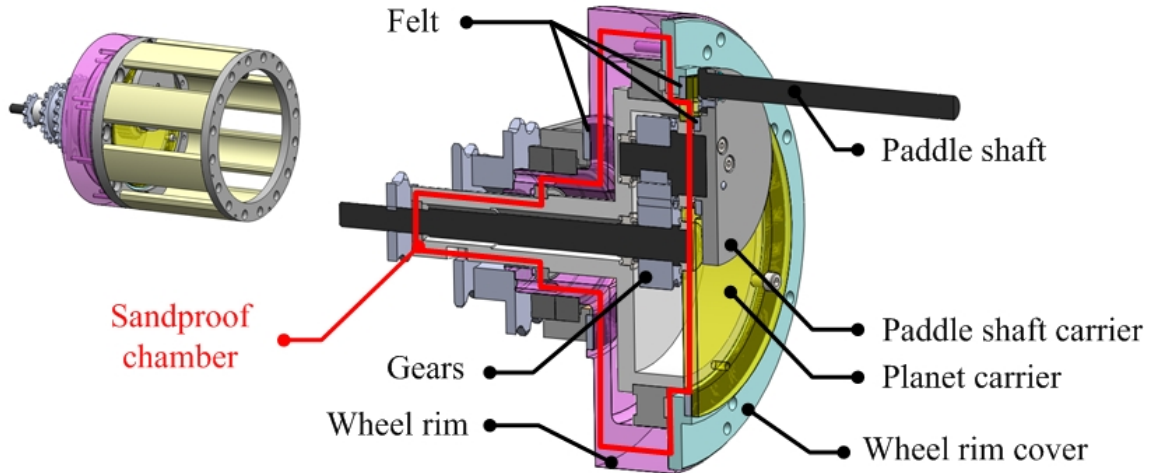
Sandproof scheme applied to the planetary gear mechanism.
